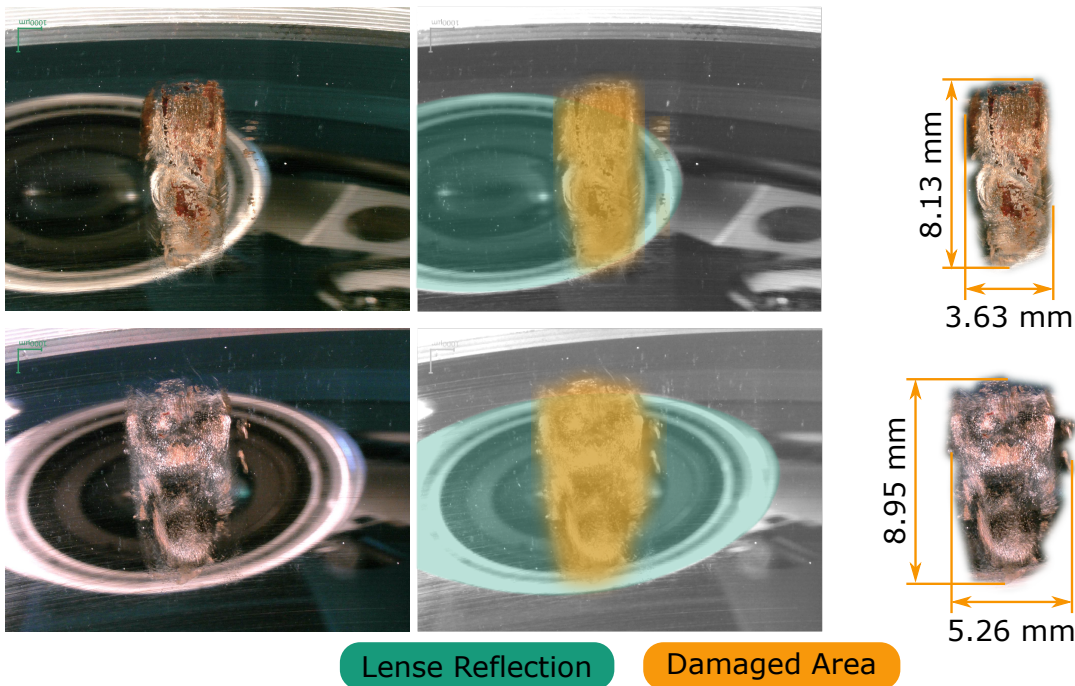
Exemplary raceway condition inner ring, Test ID 1, Bearing ID 0006
